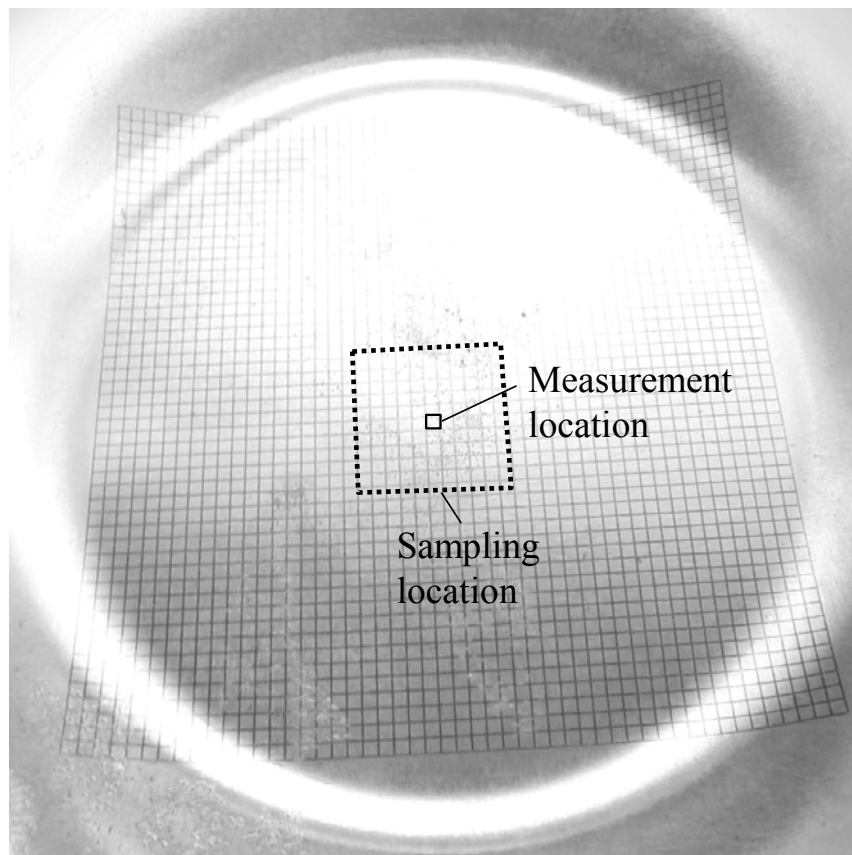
Sampling and measurement locations of specimen after Marciniak type test.
